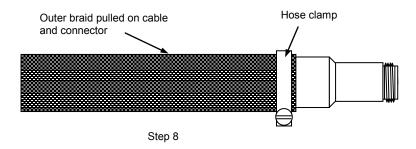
Coaxial cables: preparation of cable end "A" (1 of 2)
